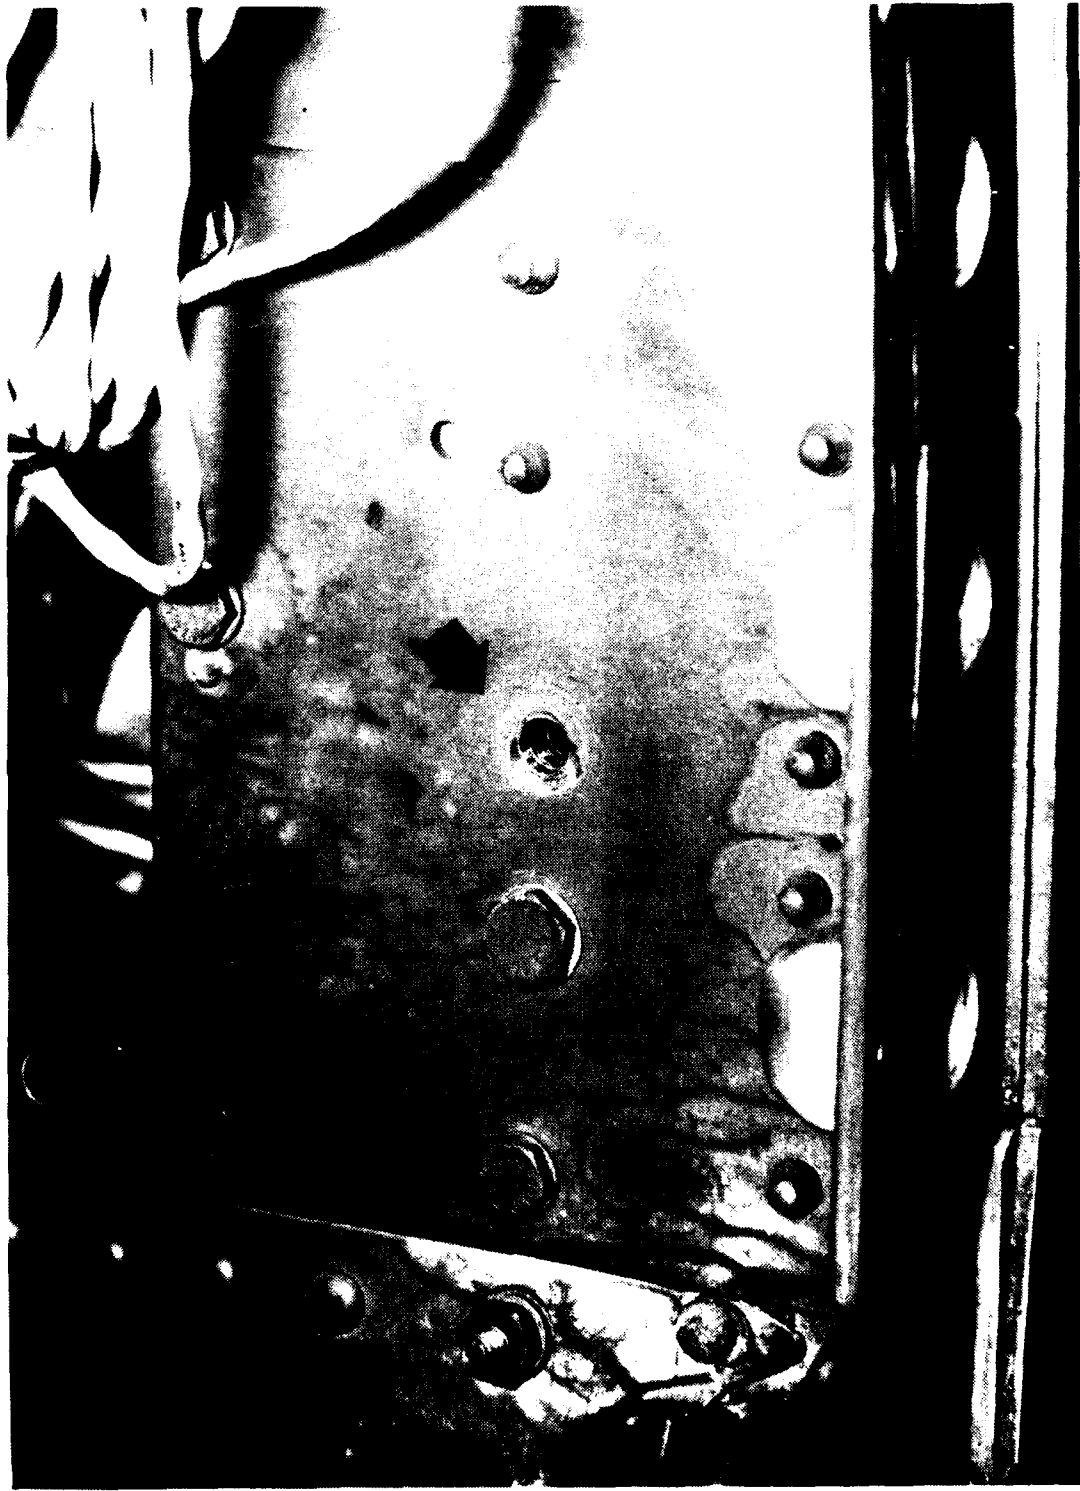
Failure of Fastener Tying Dogbone to Fuselage Vertical Wall
